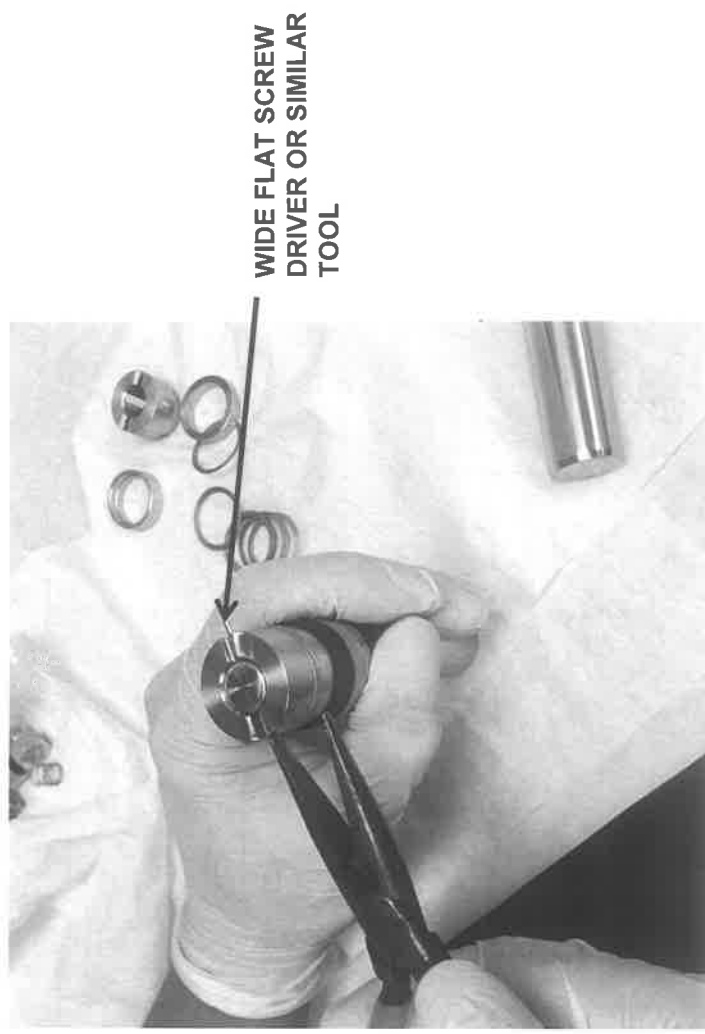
ASSEMBLY OF COTTER PIN WITH LONGER PIN FACING UP
